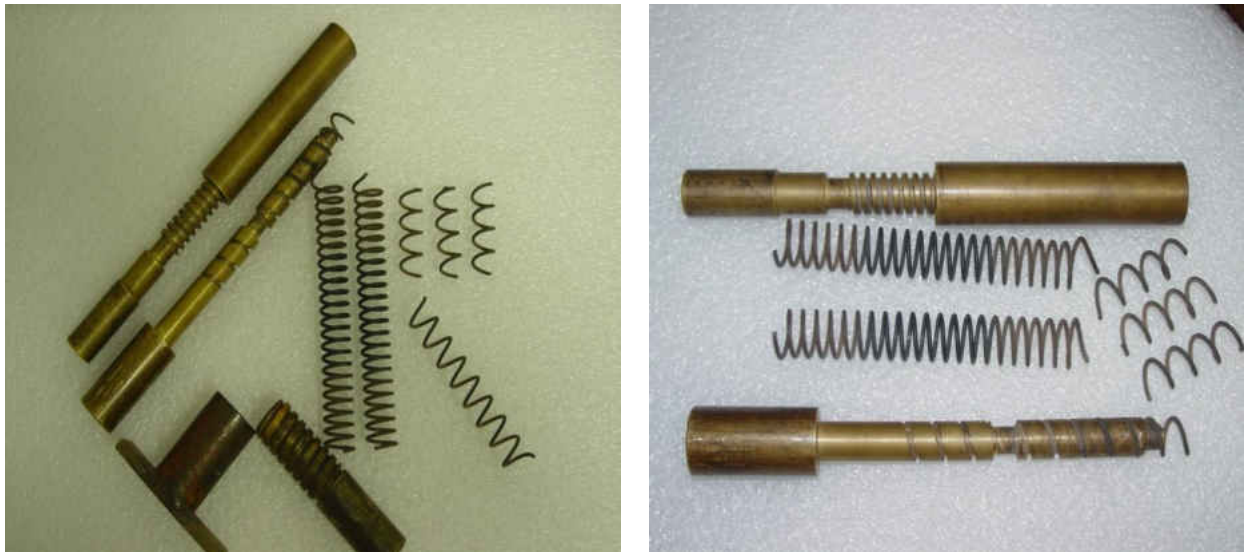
Helical shape memory alloy actuators and spring winding mandrels
